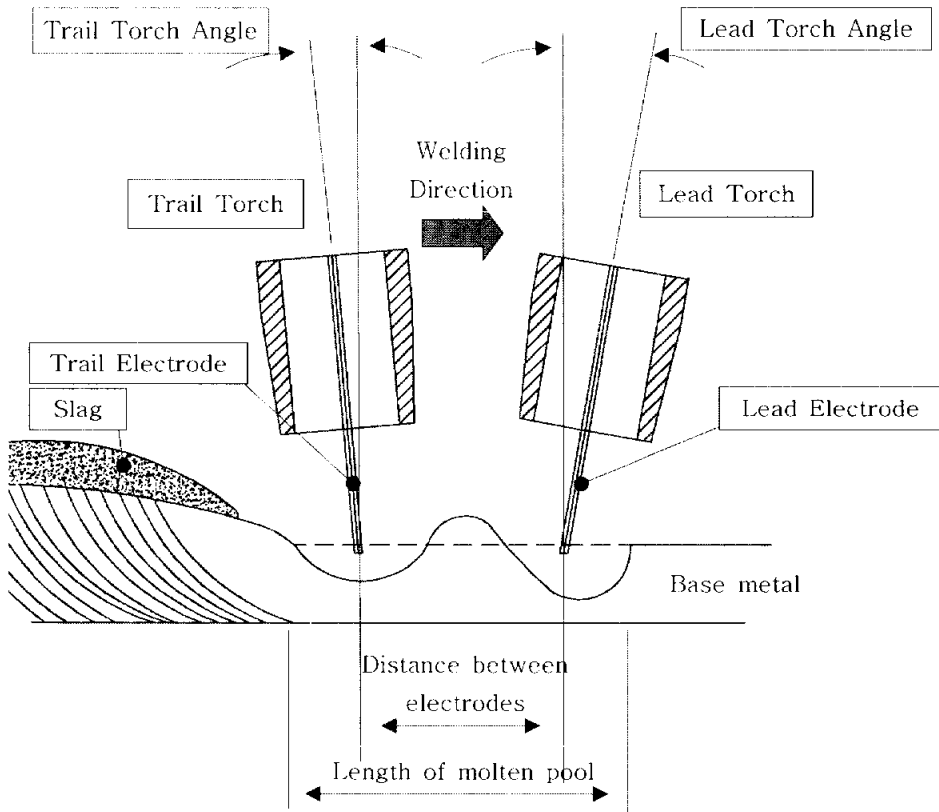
Schematic of tandem fillet welding (longitudinal)
